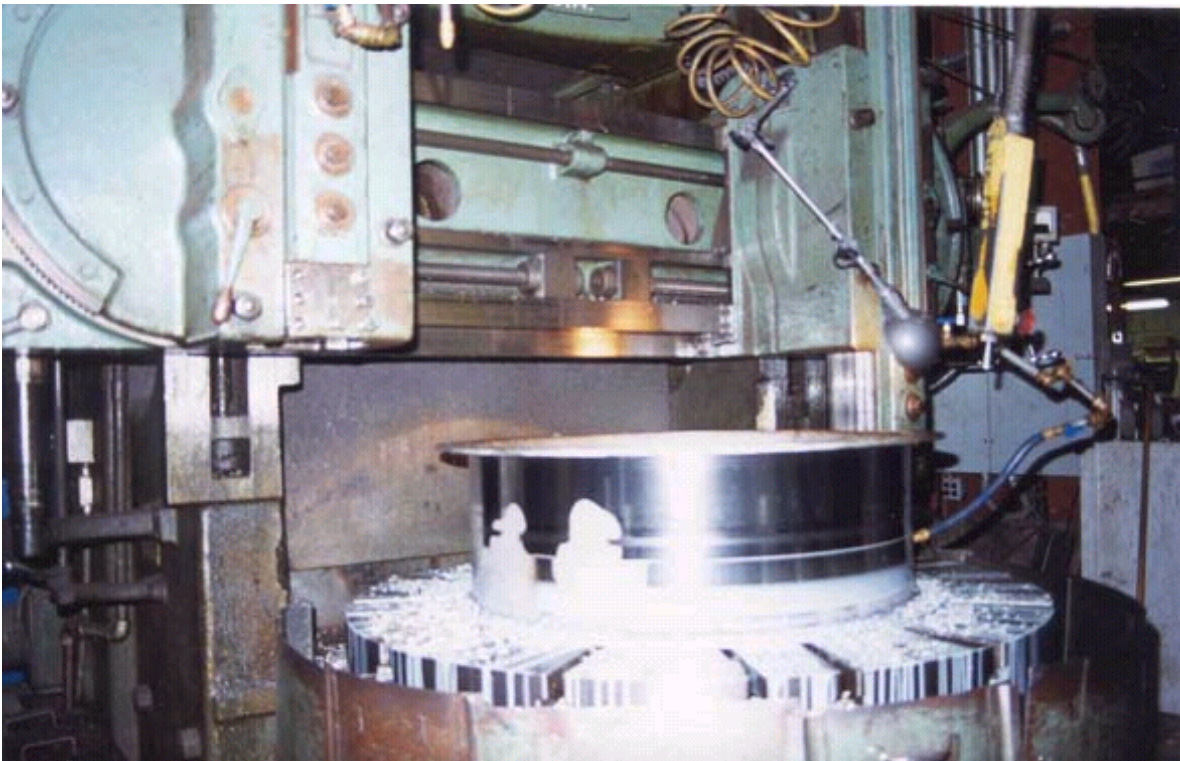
Stainless steel coil form being machined on the King Vertical Boring Mill 62" Table (internet photo from an unknown project) <http://www.metweld.com/machine.html>
